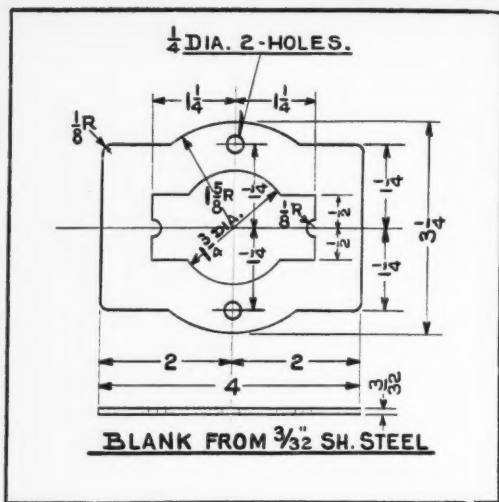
The blank shown here was produced with the punch shown in Fig. 8.
